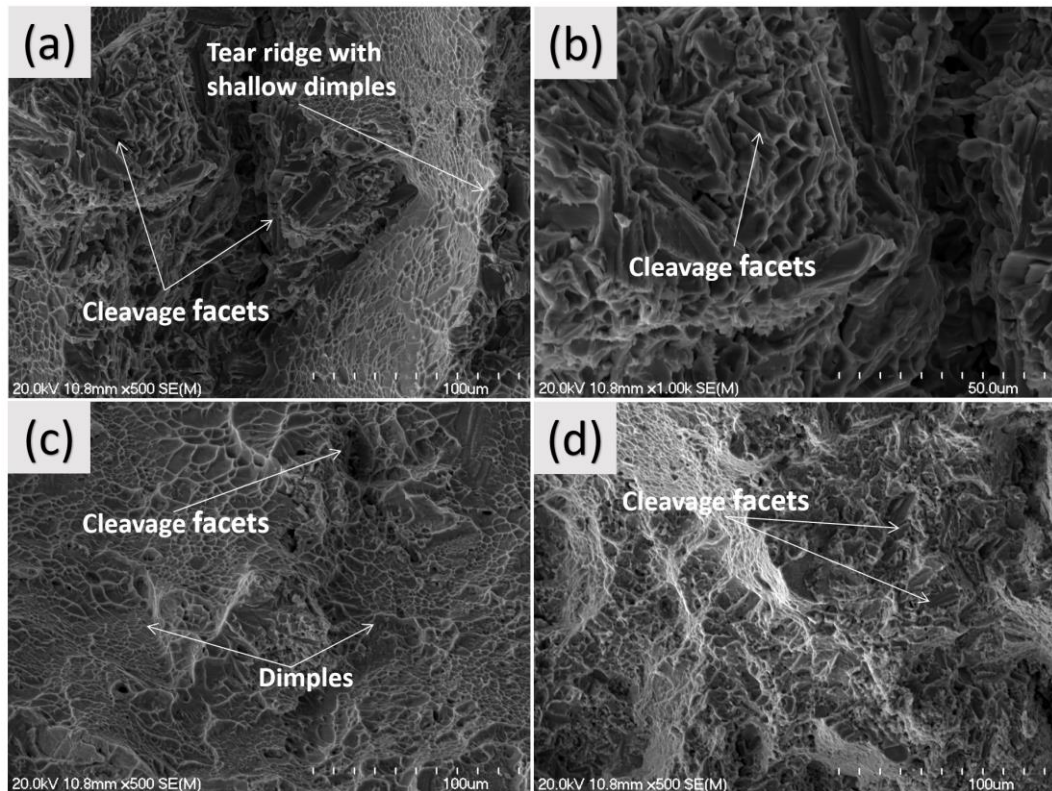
The morphological fracture surface of hot-pressed and hot extruded composites after STA-955: (a), (b)HP-STA-955; (c), (d) HE-STA-955
